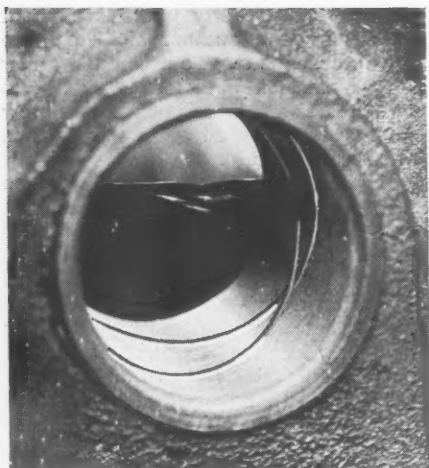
Showing How Drill is Used and Passing Through Oil Groove as Well as Aligning Holes in Web With Those in Bushing Which is Important
